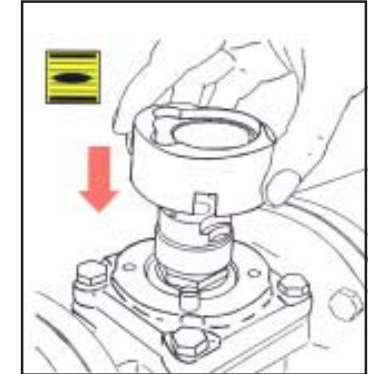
Position anchor on adaptor, making sure it engages securely on the valve top works.
